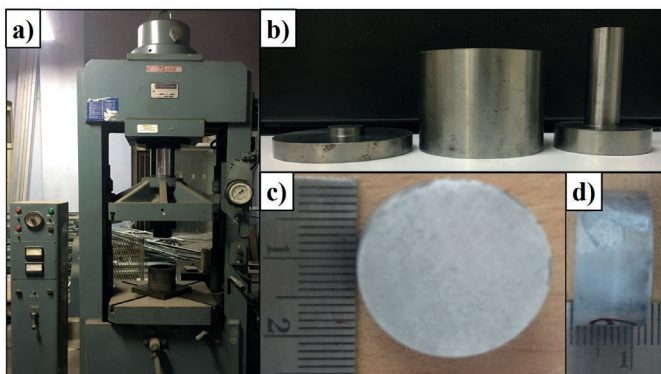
Photographs of (a) Hydraulic Pressing Machine (b) Mould (c) and (d) Al/CNT sample
